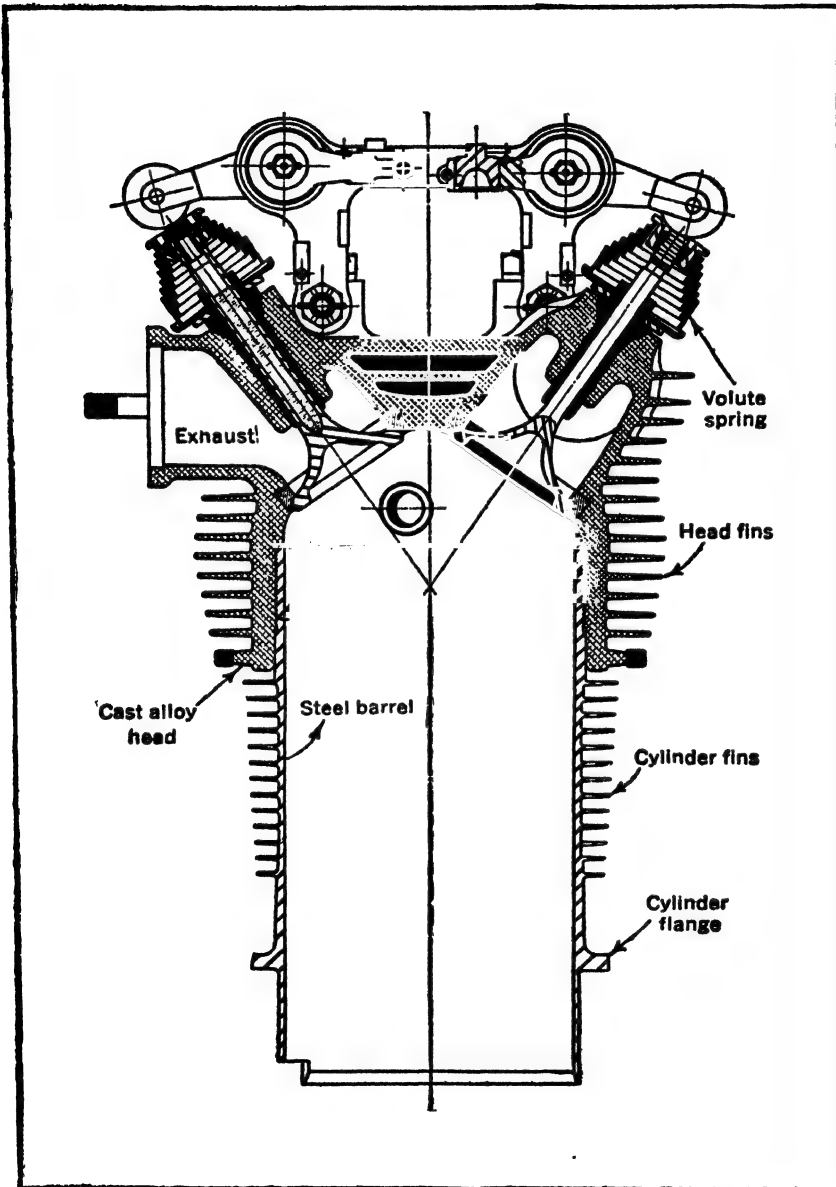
Type J Air-Cooled Engine Cylinder which will Stand a 100-Hour Full Throttle Test at 1,800 R.P.M. without Measurable Wear. Note Salt-Cooled Exhaust Valve Stem, and the Use of Volute Valve Springs.
